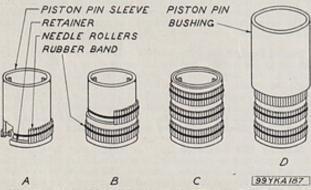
Assembling Needle Roller Piston Pin Bearing
